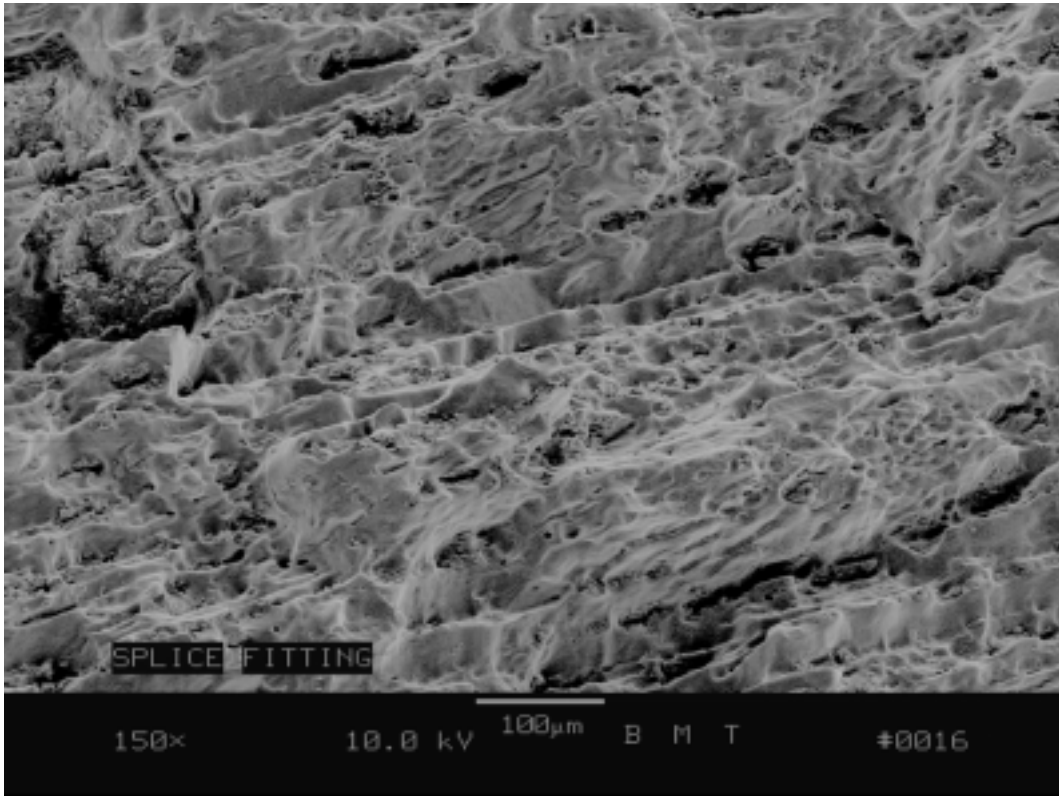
SEM photograph of the upper tee fitting fracture surface showing the typical dimpled morphology beyond the “thumbnail” region.
